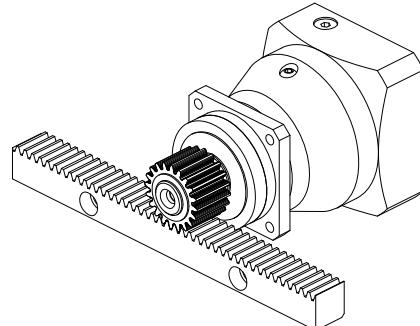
Recommendation for bearing assignment S (e.g. for straight-cut gearing)
